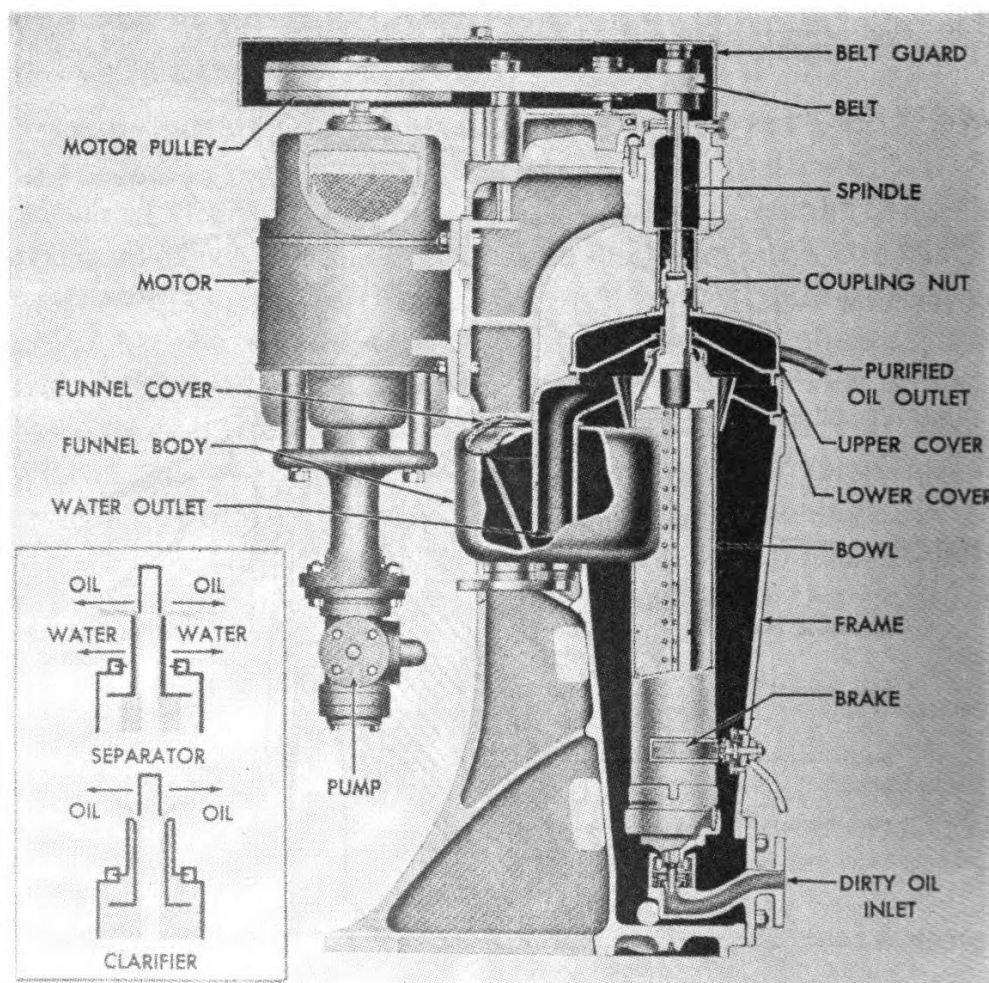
Tubular type centrifugal purifier (Sharples).
